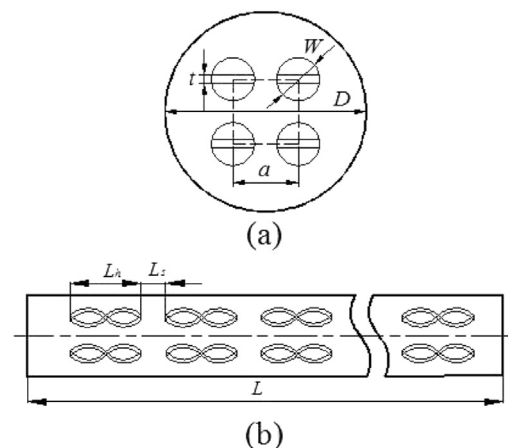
Four regularly-spaced twisted tapes in tube, (a) cross section geometric dimension; (b) axial geometric dimension.
